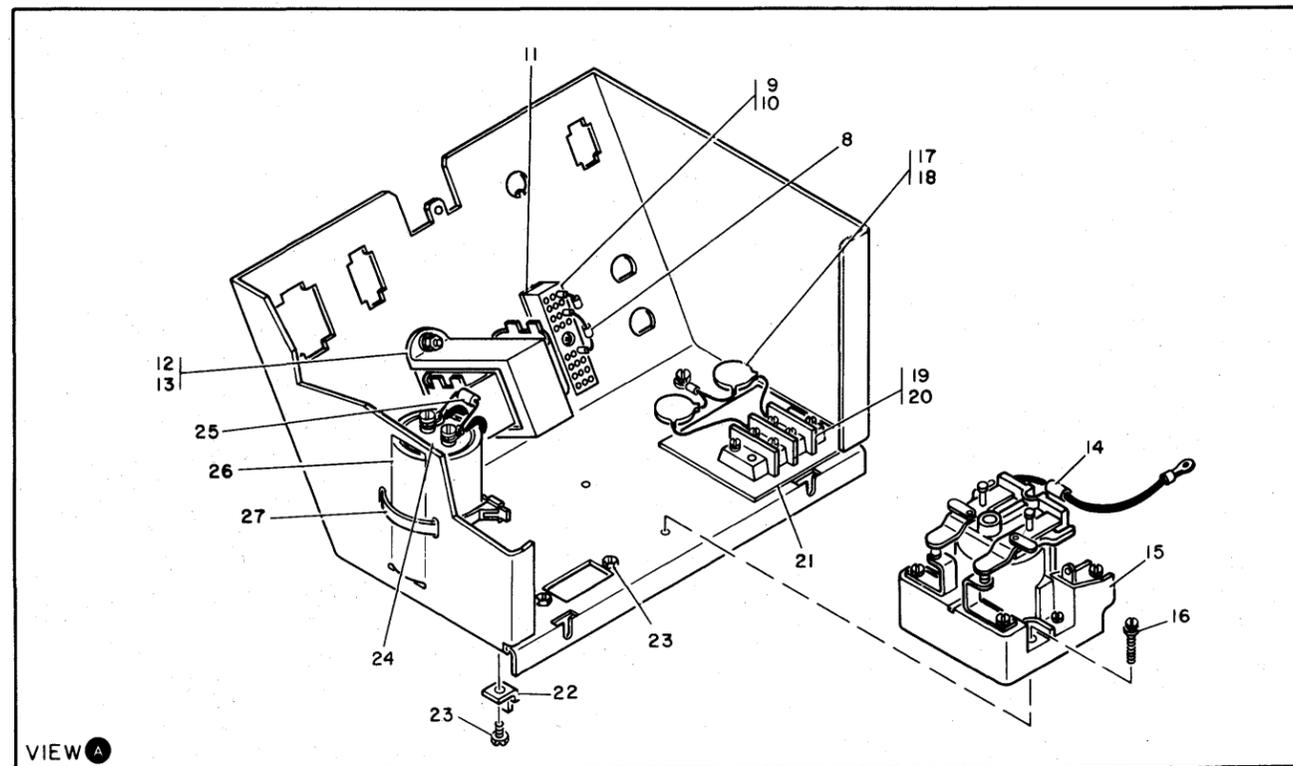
PRIMARY POWER ASSEMBLY. SEE LIST 6.
